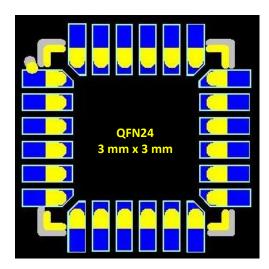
& 6b: LGA vs. QFN Footprint/Package Overlay Details
